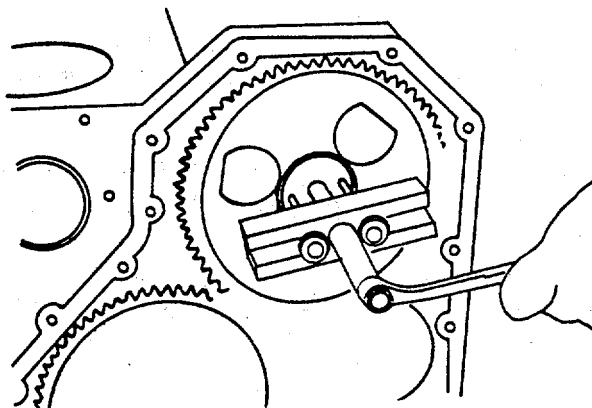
Fuel Pump Drive Gear Removal.
